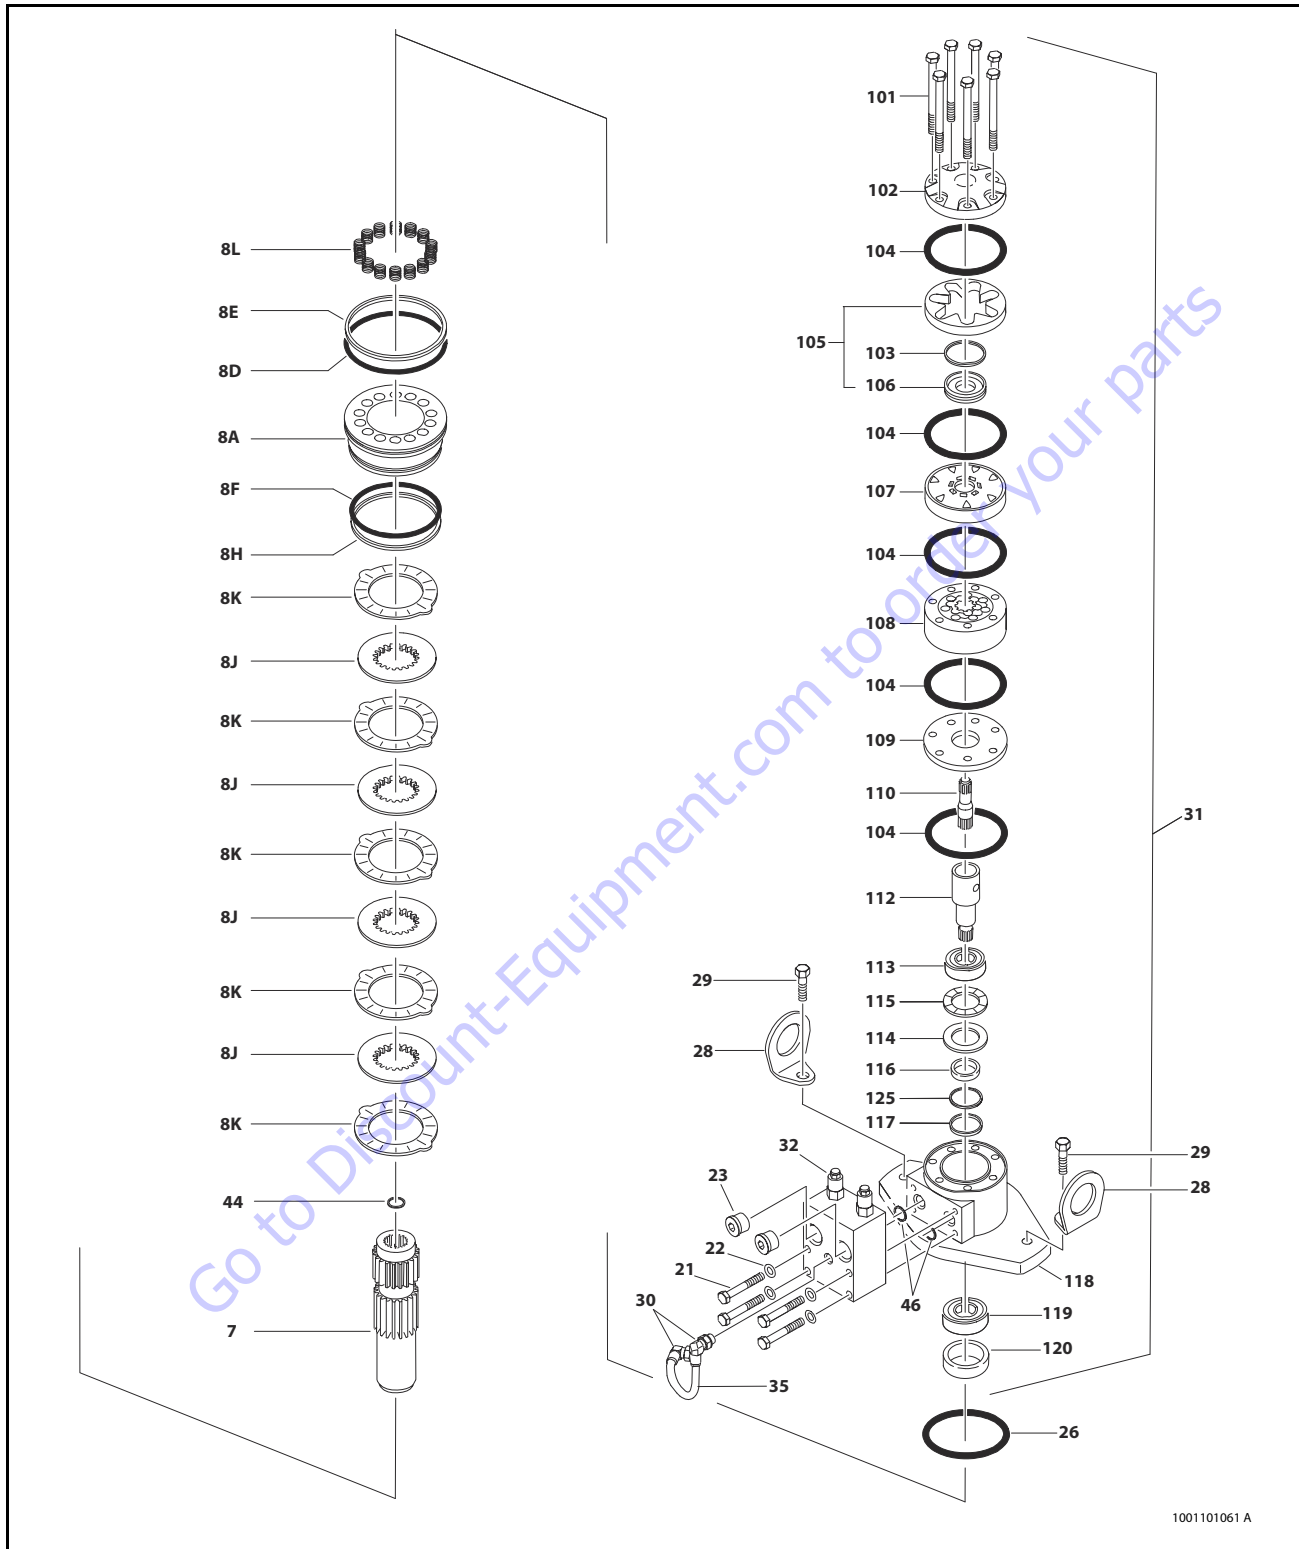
Swing Motor/Brake/Hub Assembly (USA Built Machines and China Built Machines, SN 0300137453 through 0300177361 and SN B300000100 to Present) - Sheet 1 of 3
